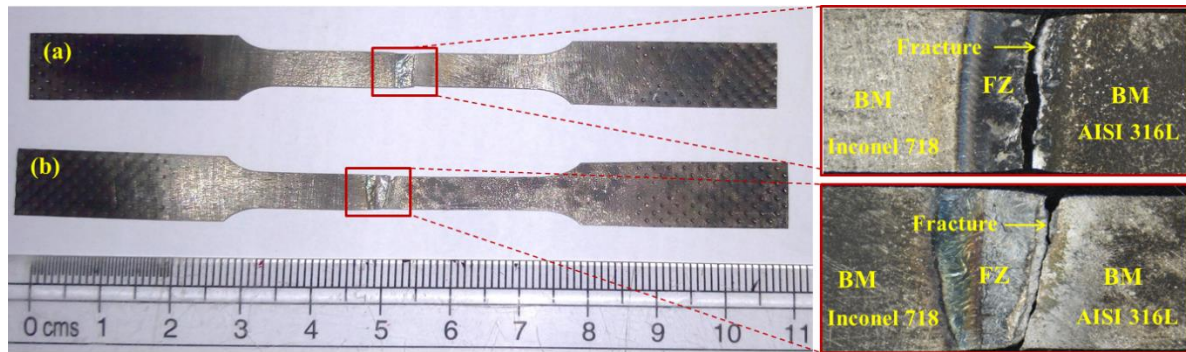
Tensile fracture images of the (a) PD1 and (b) PD5 welding conditions
